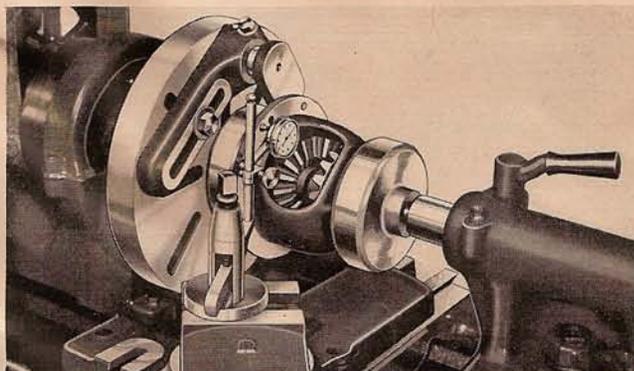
Testing Flange of Differential with Dial Indicator. This same set up may be used for testing the drive gear pilot.
